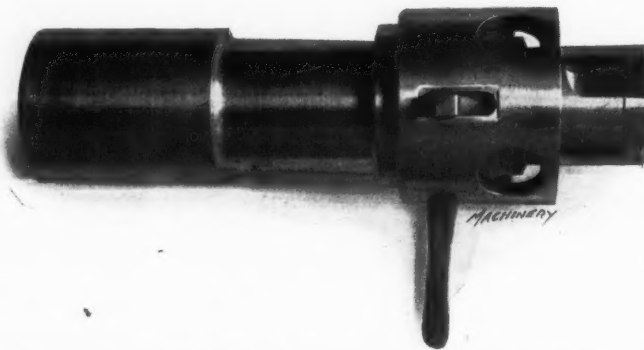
Victor Collapsible Tap used in machining Shrapnel Shells
